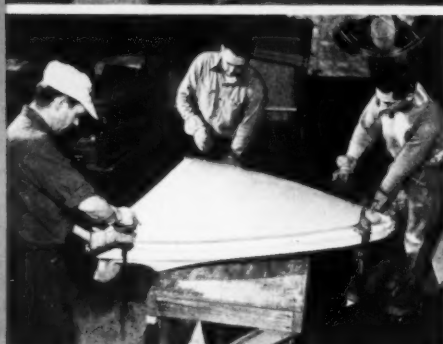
Operator holds completed boat deck. Others are visible already in place
